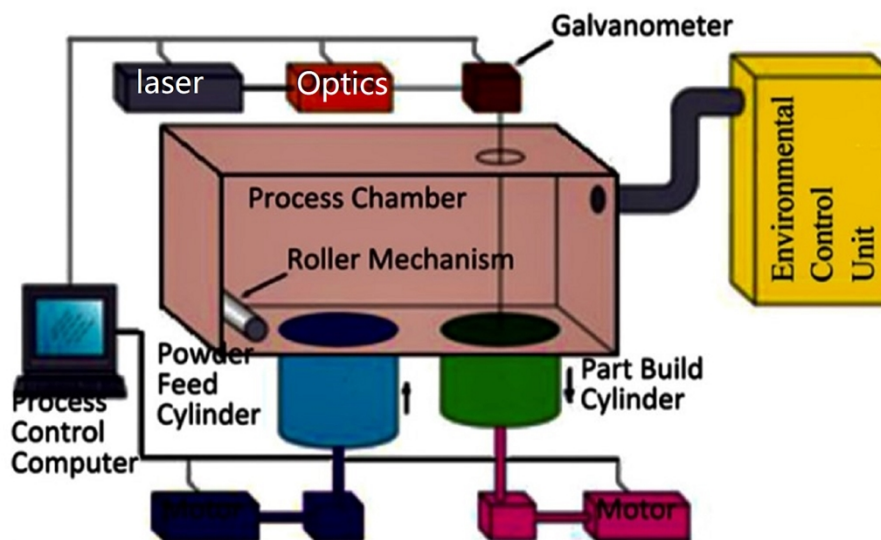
SLS machine (EOSINT P-395) [13]
